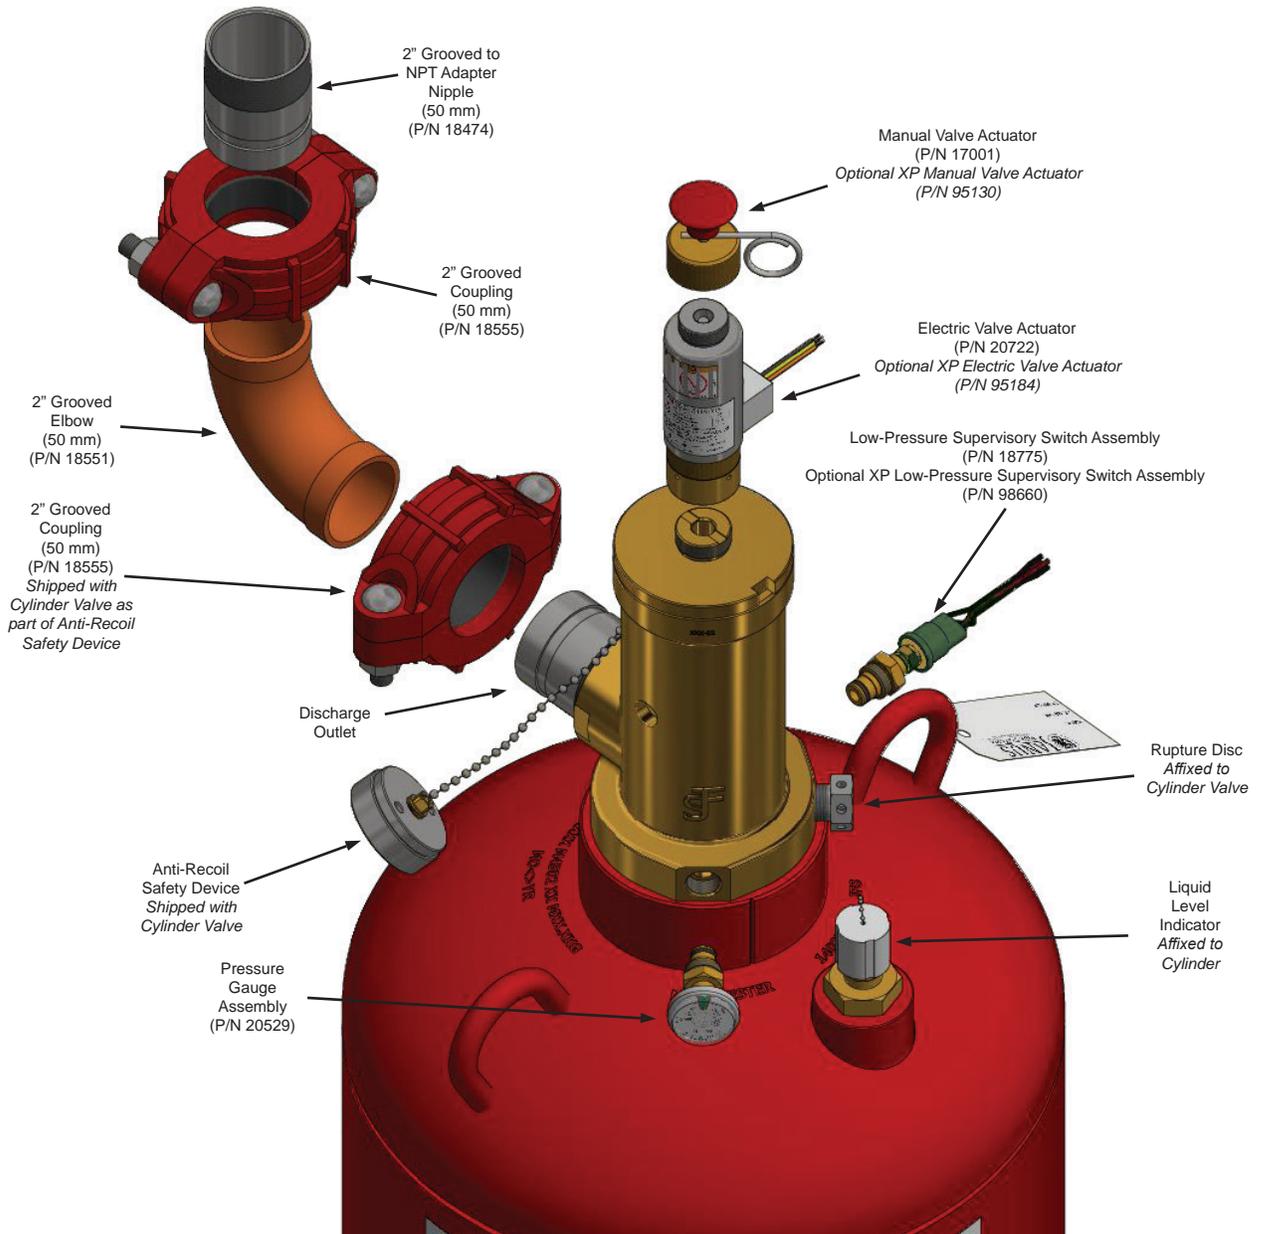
Mv Cylinder Valve w/ Trim Kit
